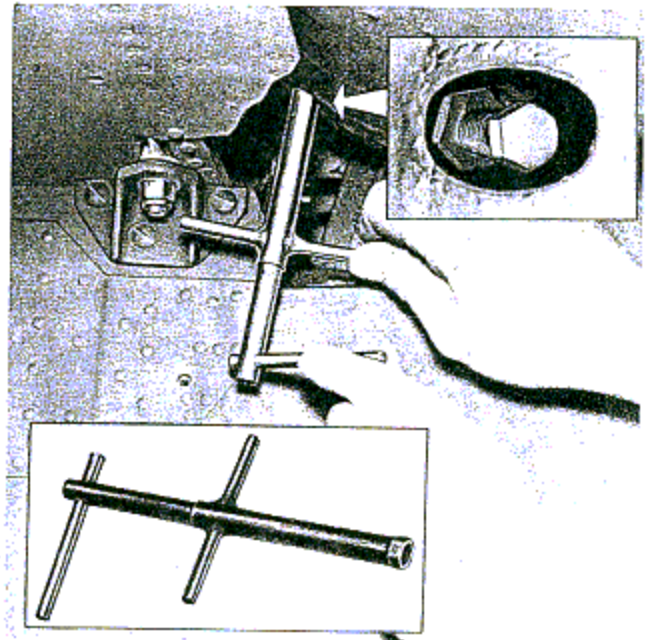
Elevator Trim Tab Control Wrench, P-20233
